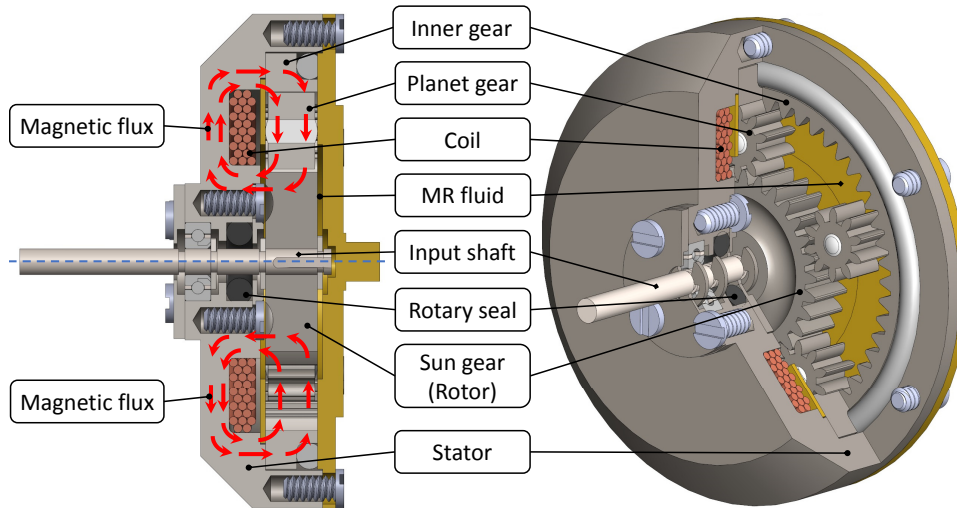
Design of the improved miniature "Planetary" MR clutch.
